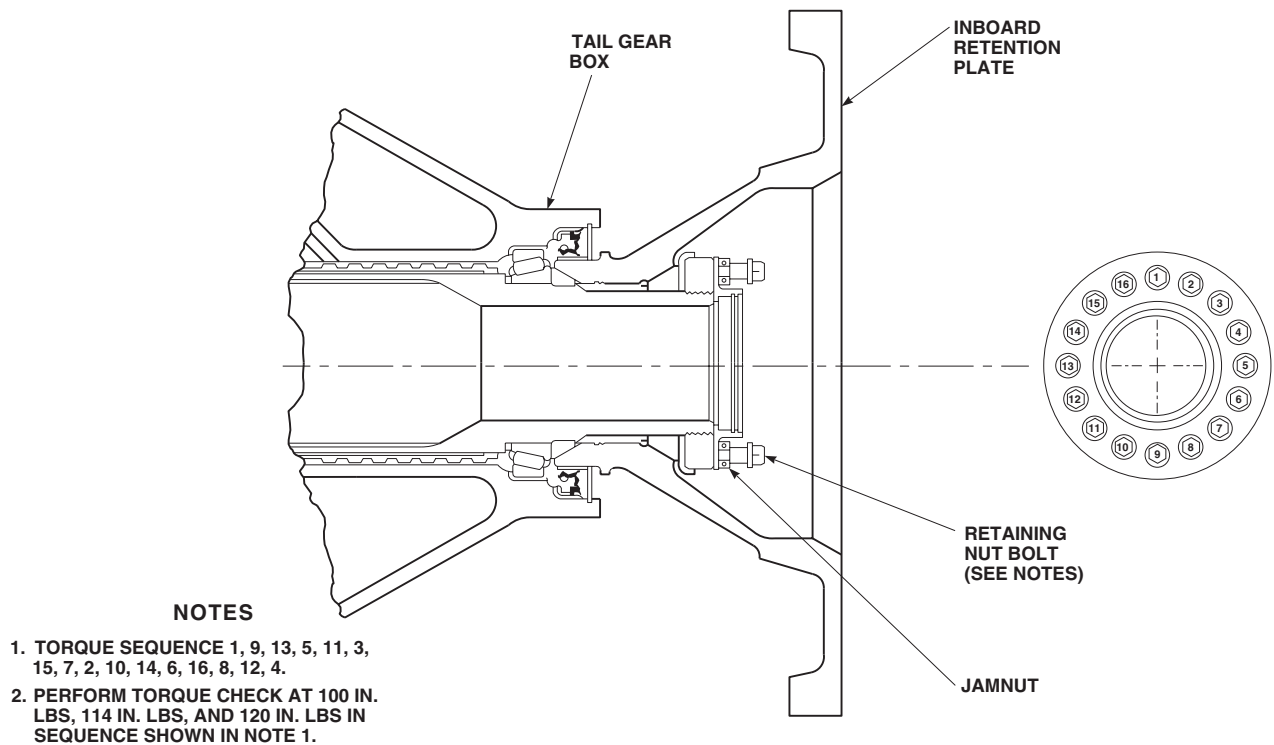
Tail Gear Box Inboard Retention Plate Bolts Torque Check - 9 to 11 Hours.
